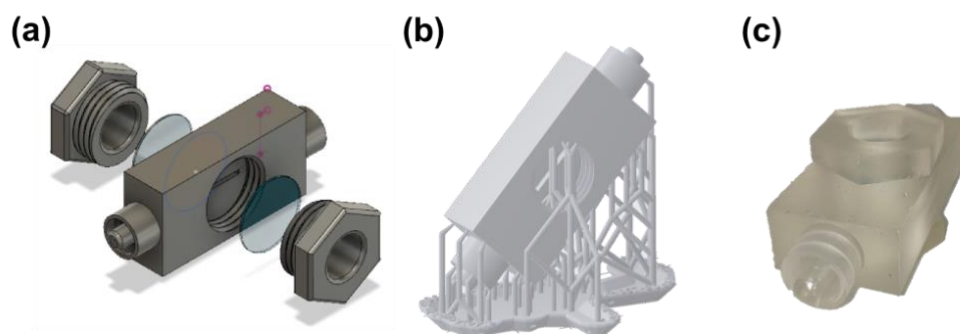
Representative images of the straight channel design during (a) the CAD process (drawing), (b) the printing process (drawing), showing the supports during 3D printing and (c) the final print with the supports removed (photograph).
